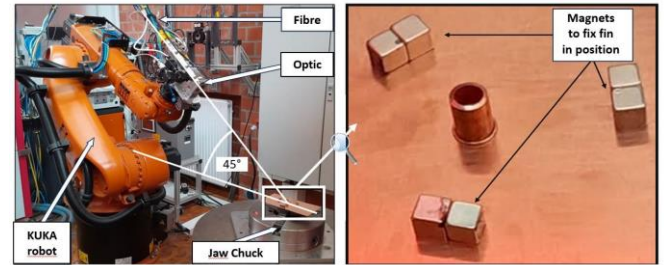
Laser brazing assembly cell, consisting of laser optic, fiber cable, robot, 2-axis positioner and sample in place (detail)
